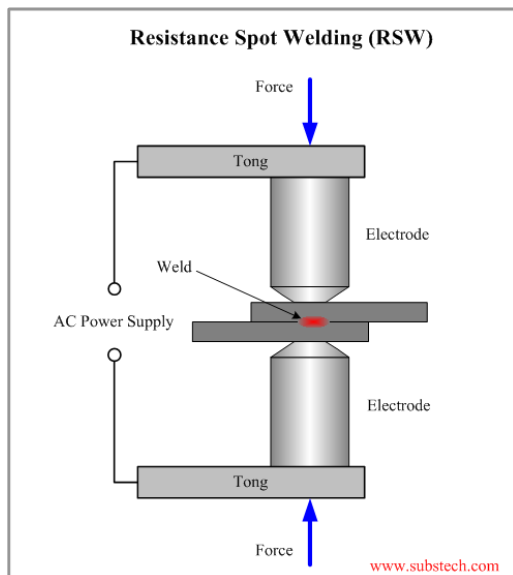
Typical spot welding of two plates (www.substech.com)
